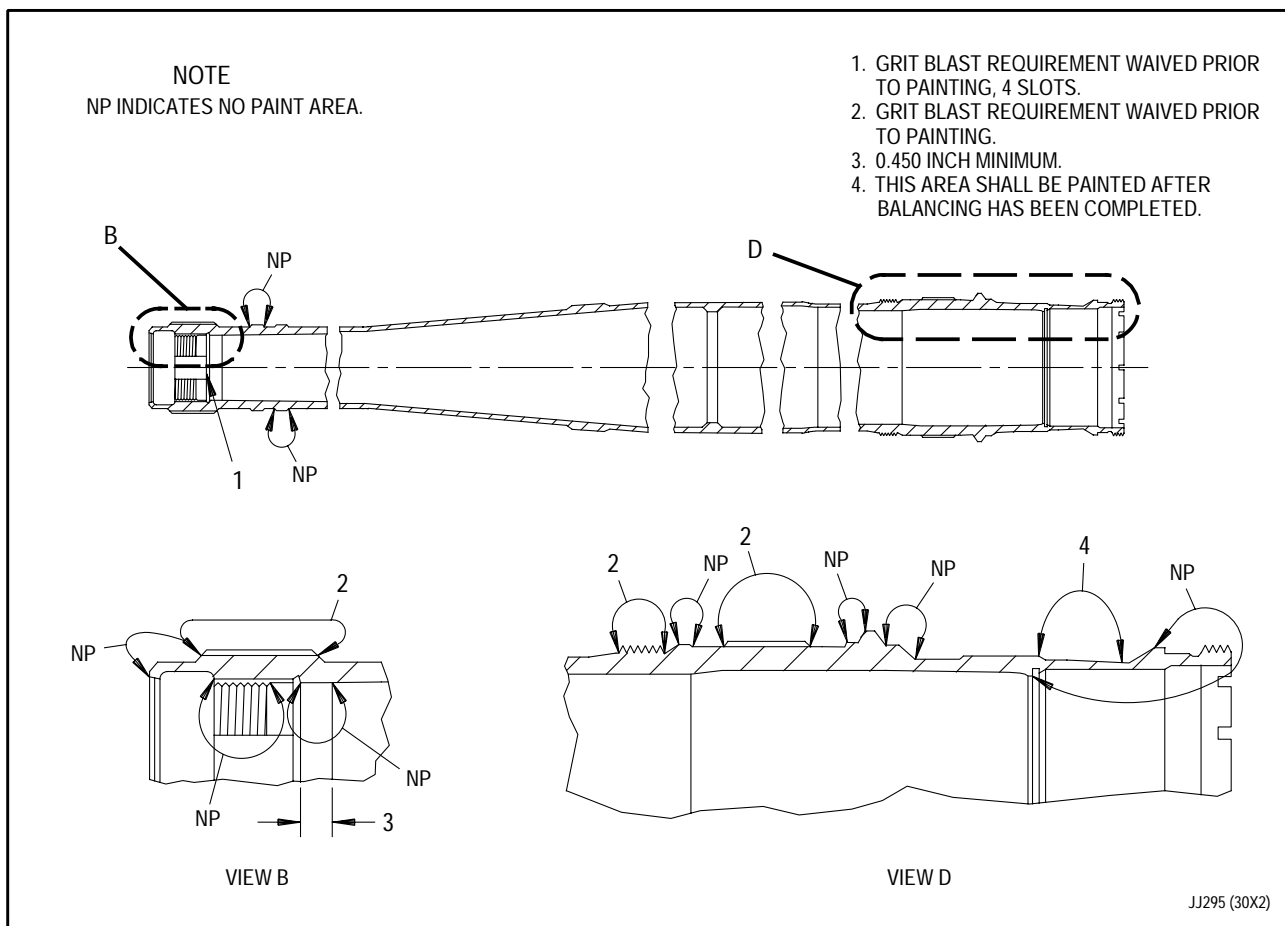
Front Compressor Drive Turbine Shaft - Heat and Corrosion Resistant Paint Application
